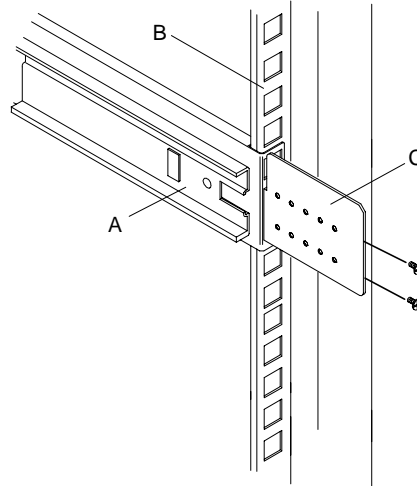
Installing the U Bracket and Small L Bracket to the Cable Arm
